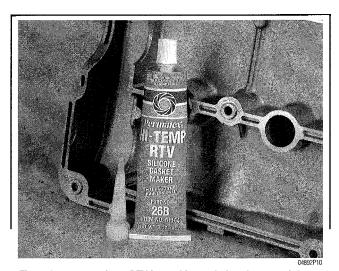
On some engines, RTV is used instead of gasket material to seal components
